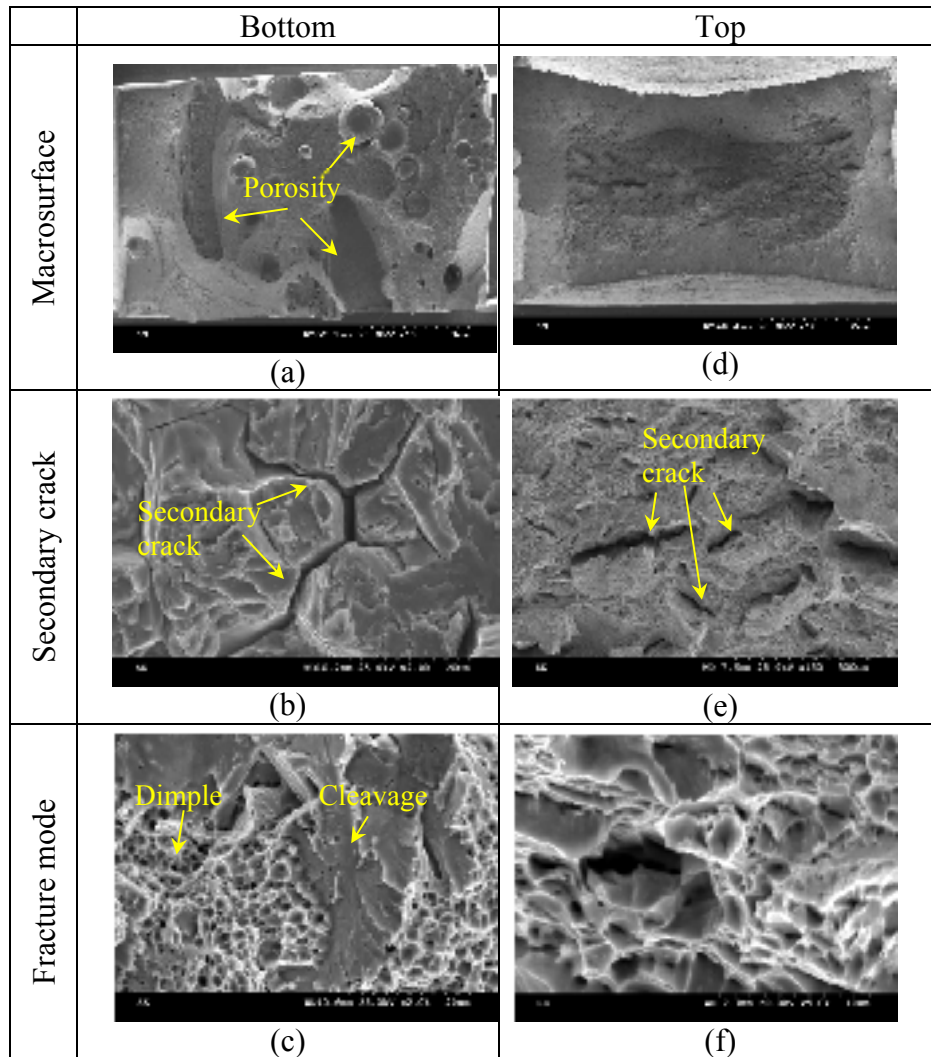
Tensile fracture surface of the weld at bottom (a-c) and top (d-f) of the full joint
